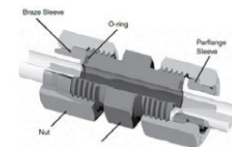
Seal-Lok Union cutaway with flanged and brazed assemblies
